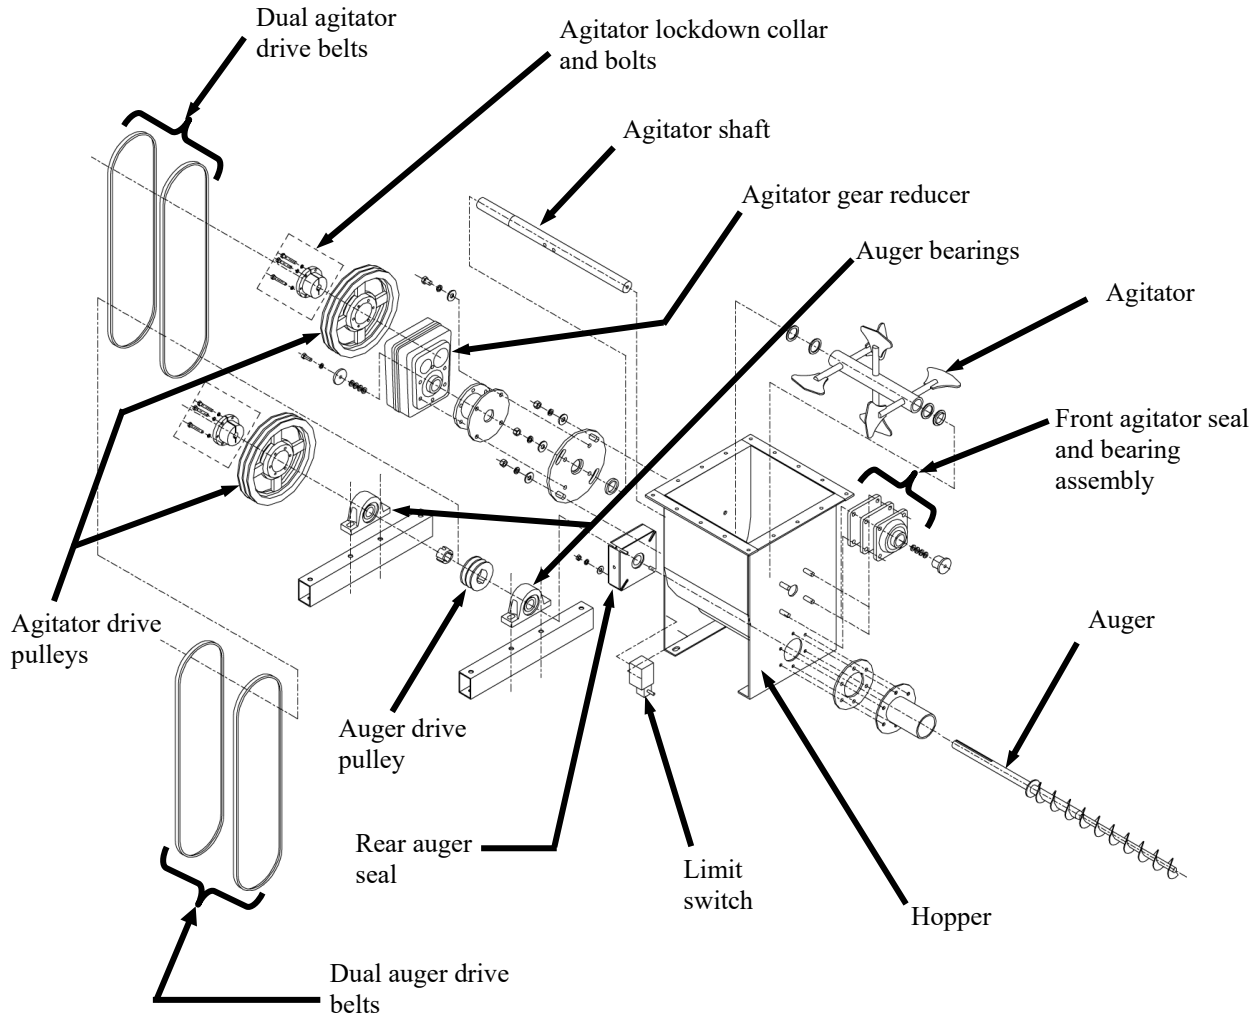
Standard Belt Driven Agitator, Exploded View
